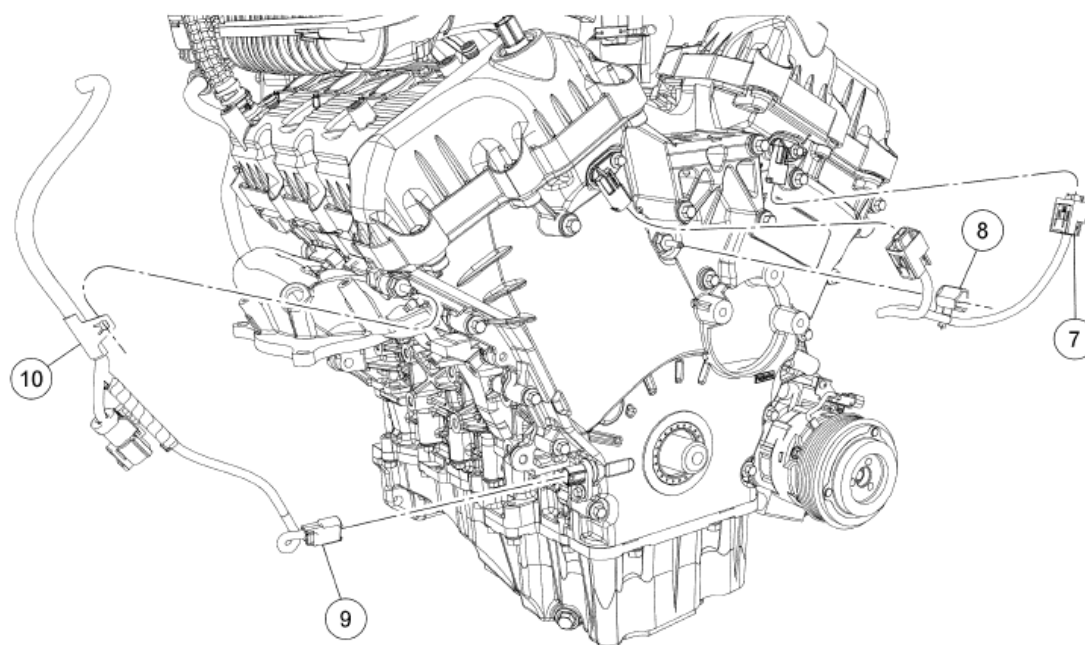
Identifying Engine Front Cover (1 Of 3)
